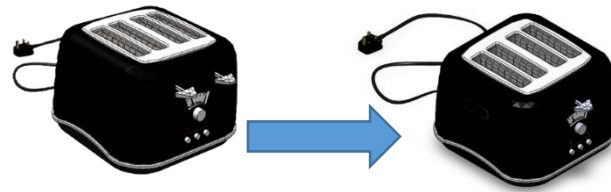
DeLonghi dual sided bread toaster assembly before and after modification
